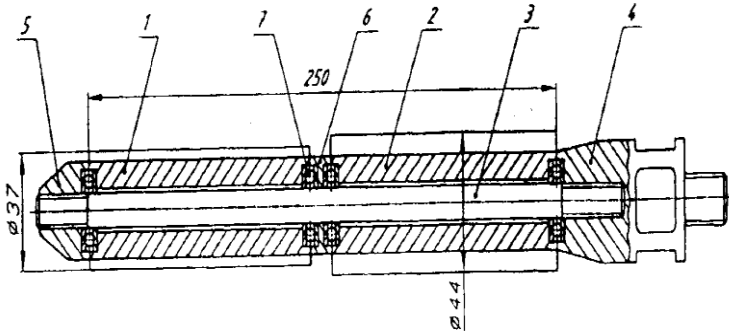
Design of domestic treatment device: 1 – small mill; 2 – mill; 3 – axis; 4 – shank; 5 – screw; 6 – spacer ring; 7 – support bearing.
